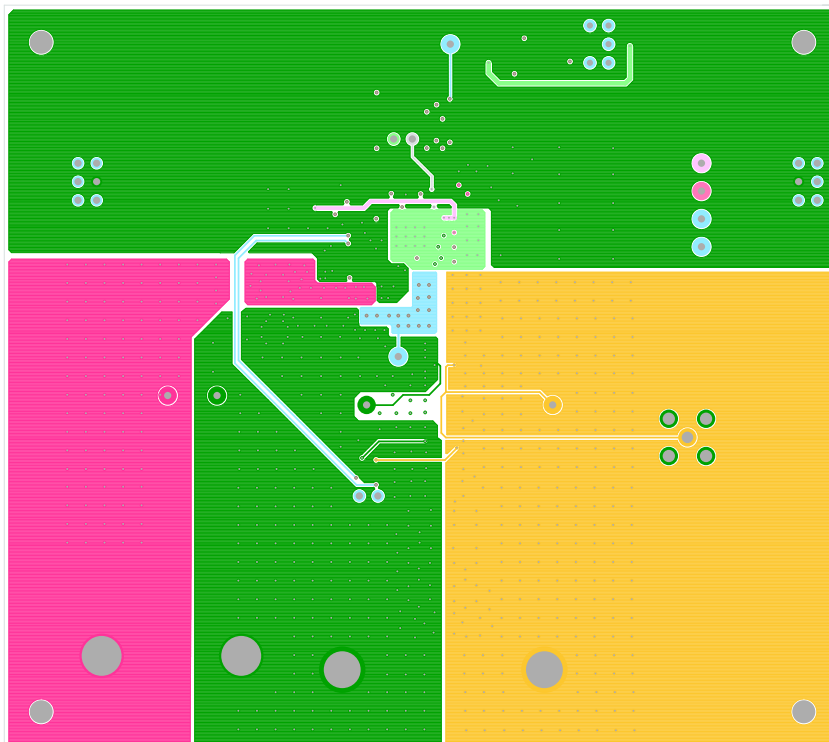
PCB - Inner Layer - Layer 3 (Top View)
